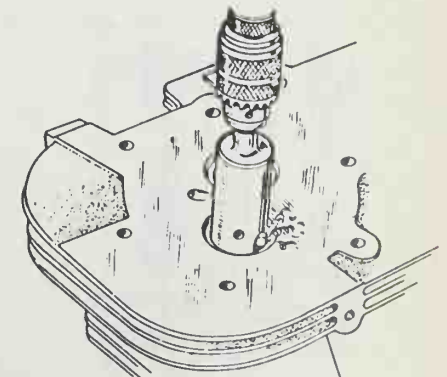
Tool set-up for removal of valve seat inserts. Adjust for 1/64-inch cut and take care not to bottom tool in counterbore.
